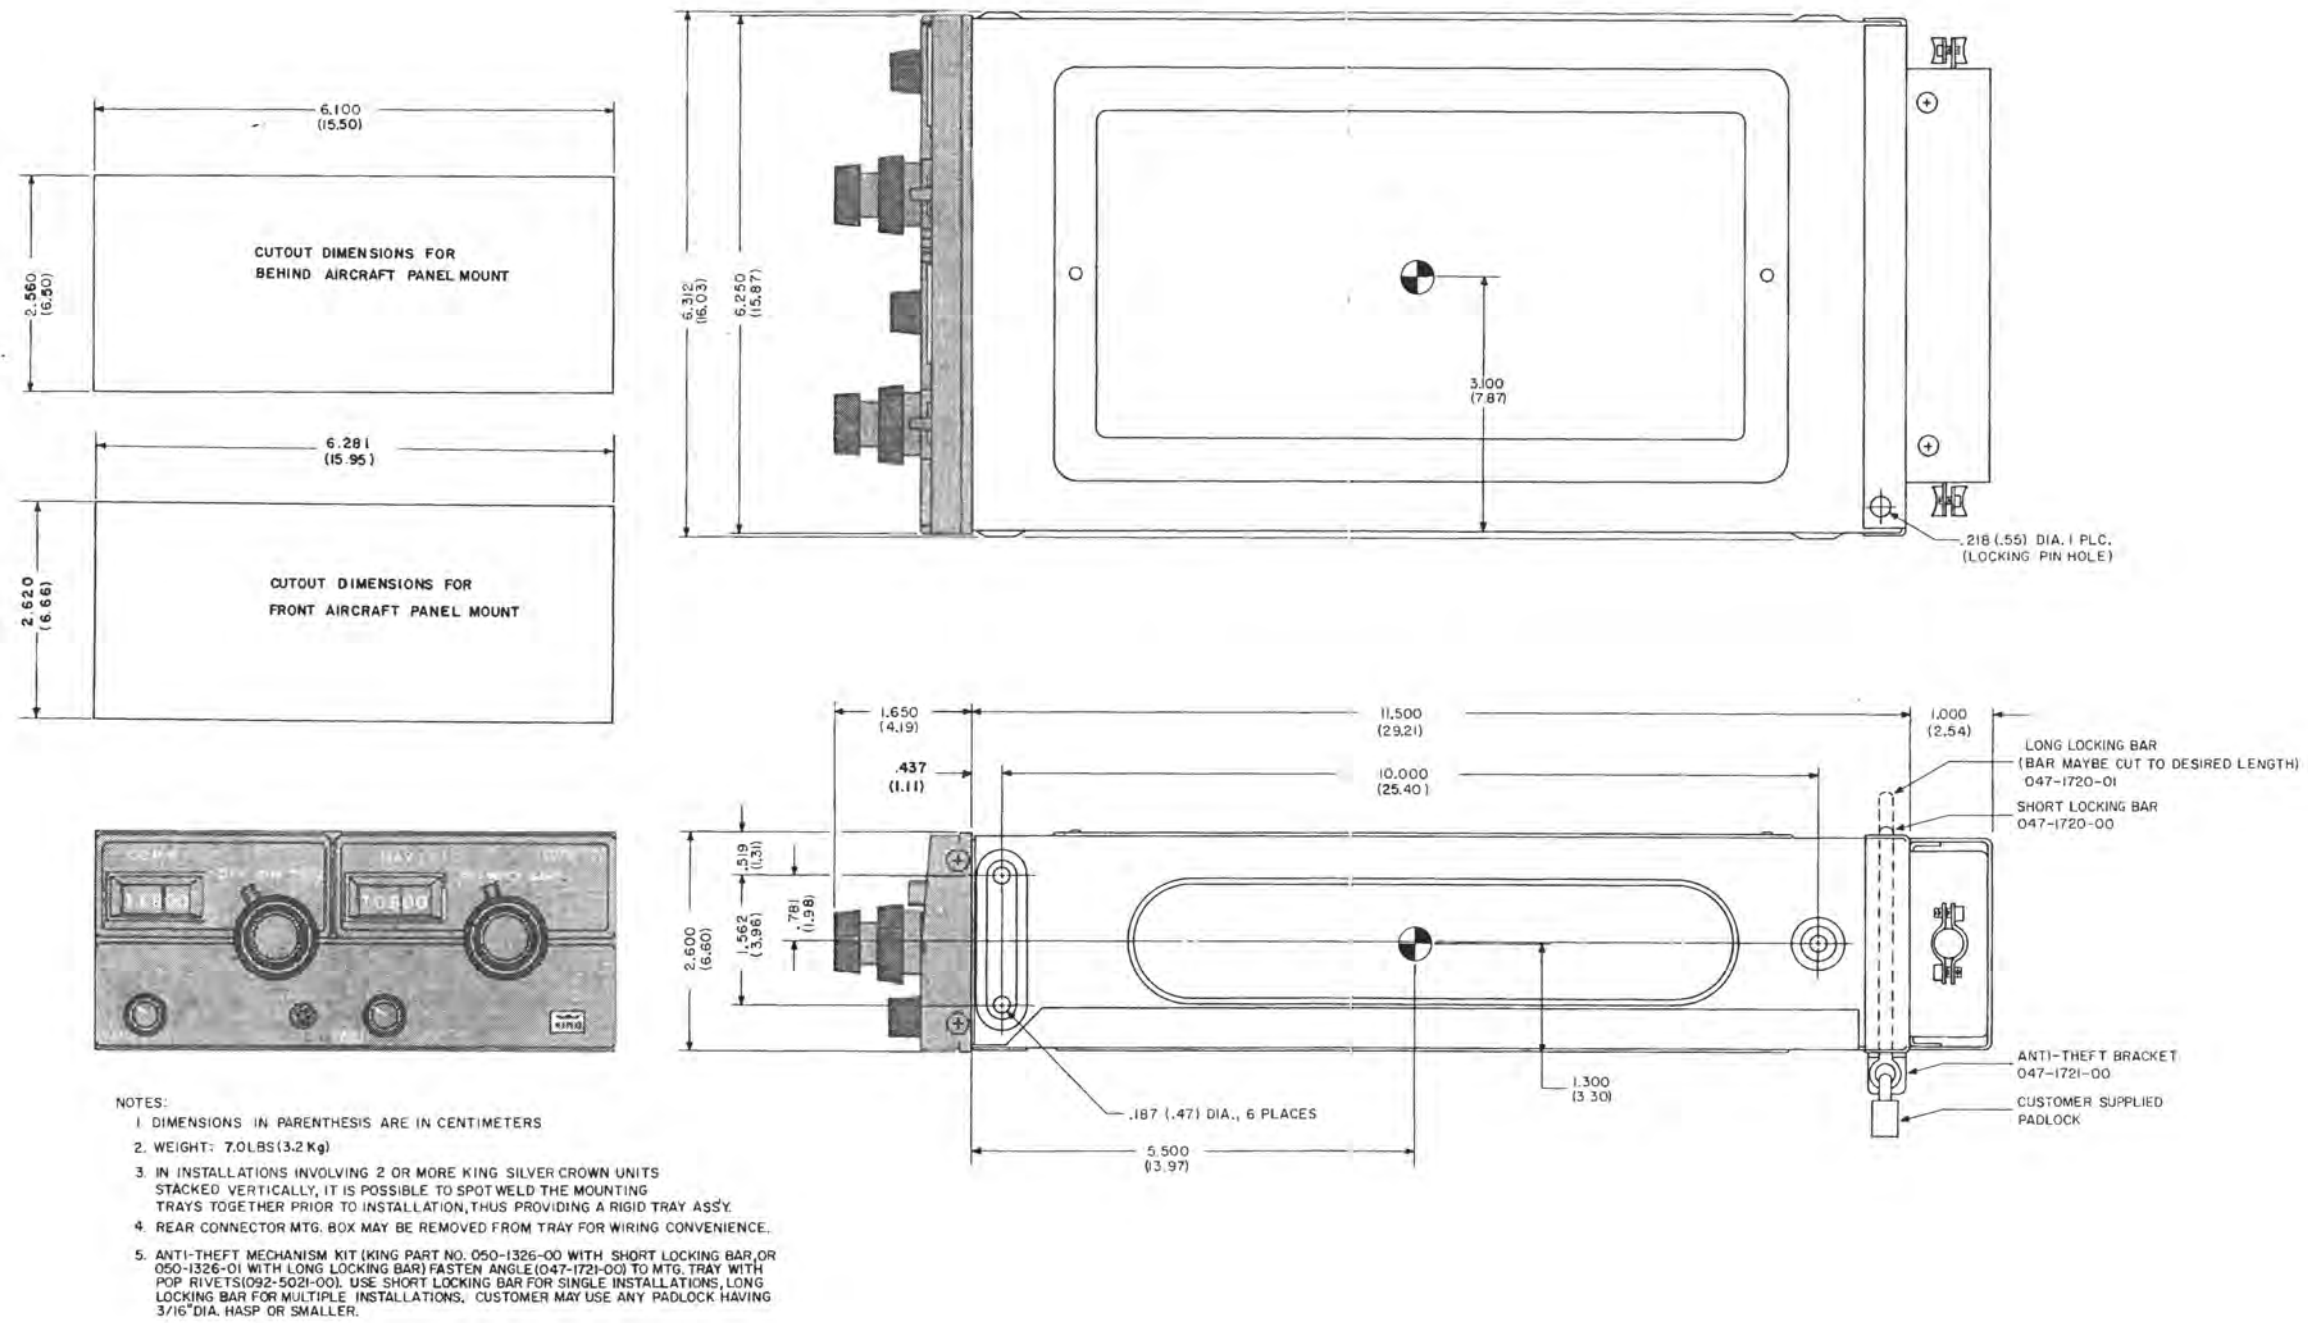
KX 170 B/175B OUTLINE AND MOUNTING DRAWING
